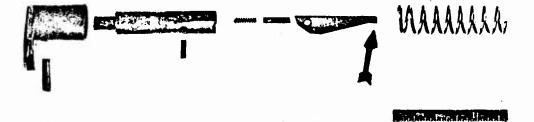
Second Design of Bolt Closure Pawl Assembly. The Pawl Tip and Plunger Spring Have Been Redesigned.
